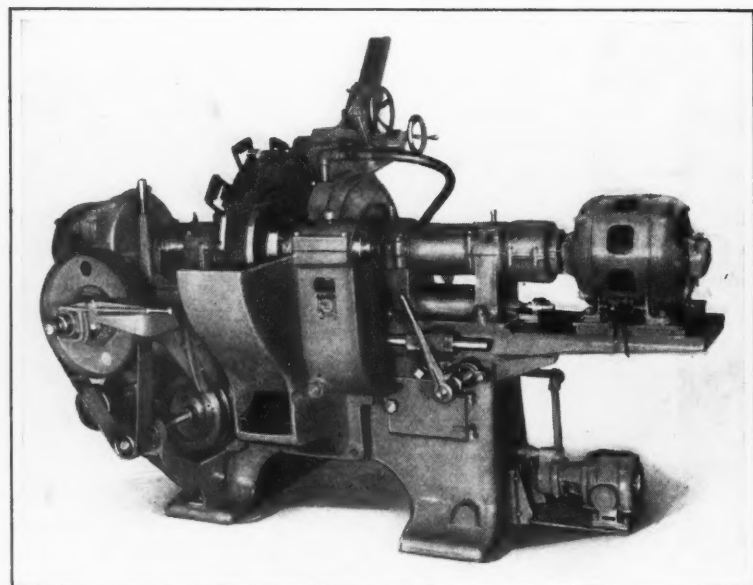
Machine of Special Design Employed in Grinding Universal Joint Blocks to Length
